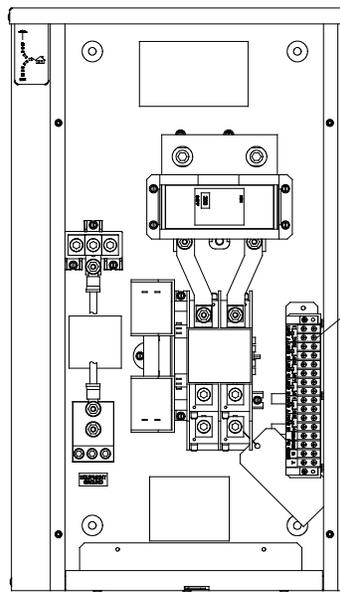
Typical Load Shed Kit Mounting Locations, Model RXT with Mounting Holes and/or Hardware
